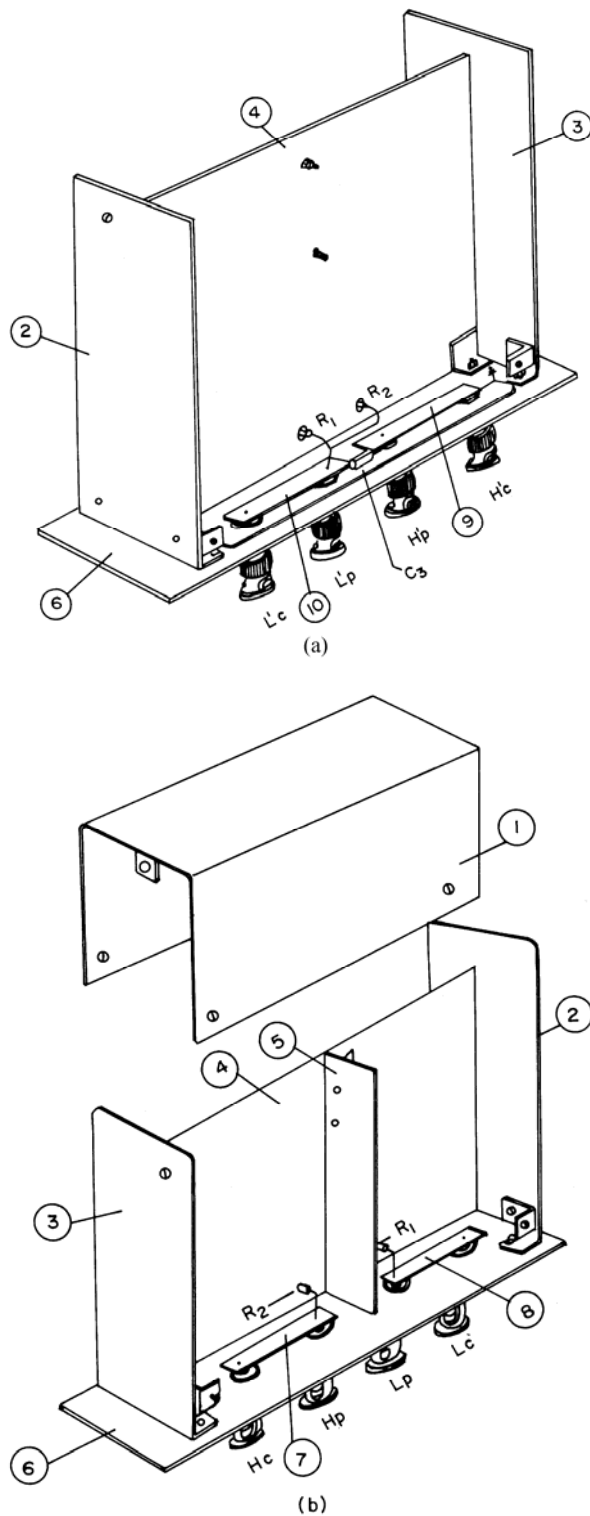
a) Left side view of the inside of 4-TP standard inductor; b) Right side view of the inside of 4-TP standard inductor with shielding cover removed. 1: Shielding cover; 2 & 3: Side plates; 4: Centre plate; 5: Shielding plate; 6: Front plate; 7-10: Copper strips; C: Capacitor; R_1 , R_2 : Thin film resistors; L_c , L_p , H_c , H_p : BNC Connectors; and L_c , L_p , H_c , H_p : BNC connectors.
